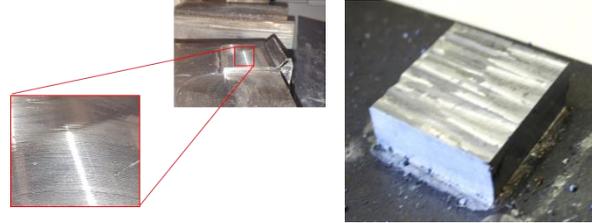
Hybrid 3D metal printing delivers same quality as CNC machining process
